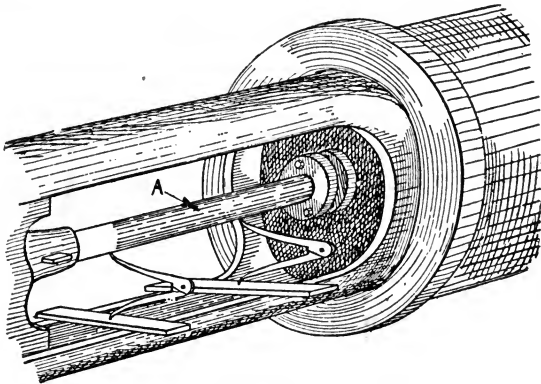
,293.—Alignment test of piston rod. The first step toward success and economy in the use of rod packing is to see that the rod is smooth and that it is exactly in line. The vertical alignment of the rod can readily be ascertained by means of a straight edge and a pair of inside calipers. Place the crank on the dead center farthest from the cylinder. Lay the straight edge flatwise across the guides, and with the calipers obtain the distance between the rod and the straight edge close to the stuffing box. Then find where the rod stops when entering the stuffing box, and at a point corresponding to the depth of the stuffing box, as at A, try the calipers. The cross head should be raised or lowered until the calipers just touch the rod at both these points. It is not desirable to caliper at the extreme end of the rod where it enters the stuffing box, because if grit has worked into the packing for months, perhaps years, the rod will often be found smaller at the point where it reverses its motion in the packing. And the entire length of the wearing portion of the rod may be smaller than at a point next to the cross head, so that the calipers should not be used at that point. The points mentioned are those where the wear is usually uniform and the rod of the same size.
